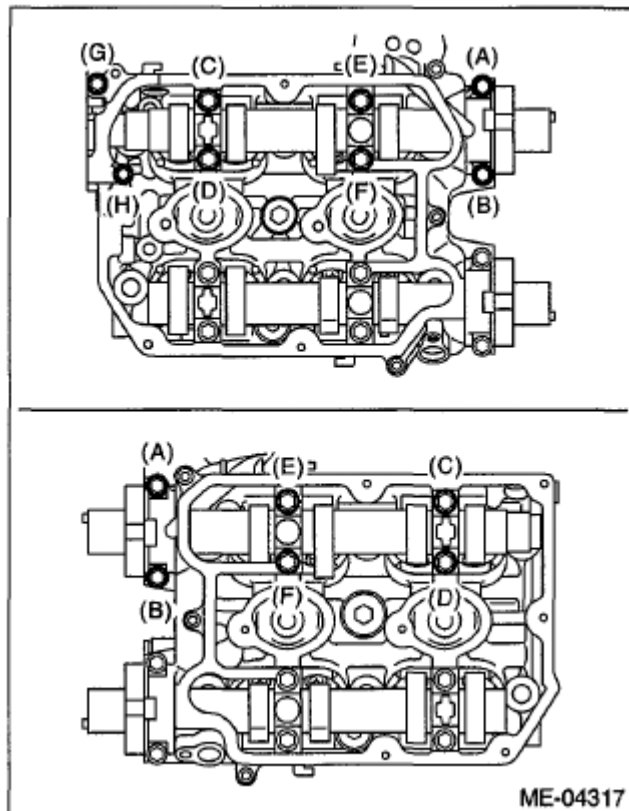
Identifying Front Camshaft Cap And Exhaust Camshaft Cap Bolts
